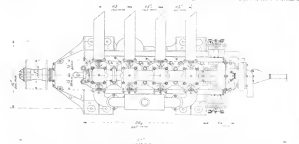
Plan view of the Hall-Scott Type A-7 engine
